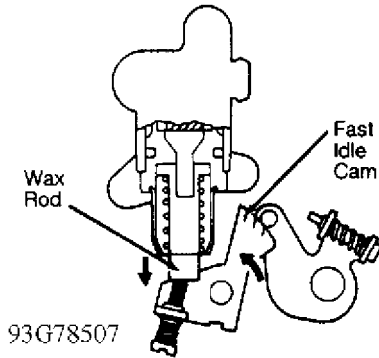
Checking Fast Idle Cam Separation (RX7)
